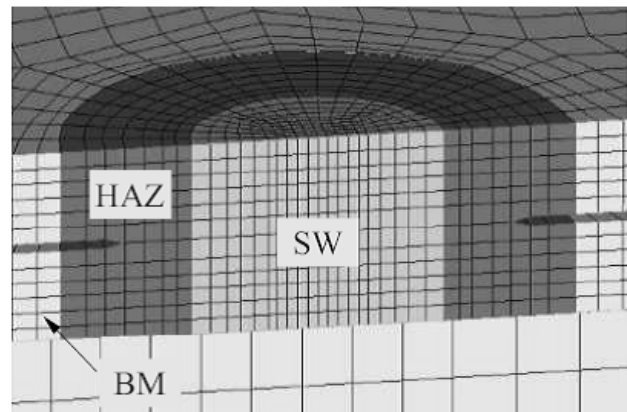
Example for a highly detailed spot weld model using solid elements. The spot weld model accounts for three different types of materials: Spot weld (SW), heat affected zone (HAZ) and base material (BM) [4].
